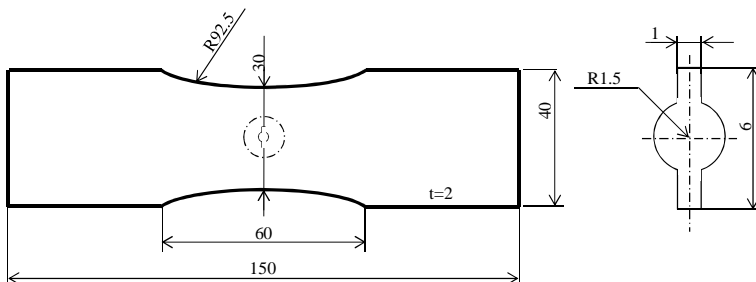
Shape of specimen for fatigue crack propagation rate test.
